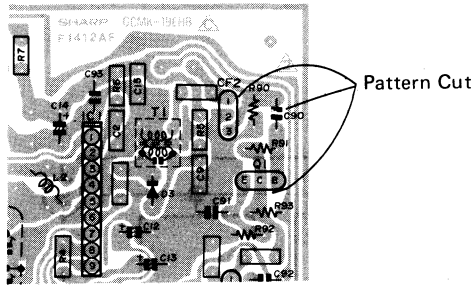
WIRING SIDE OF P.W. BOARD (2/2)
